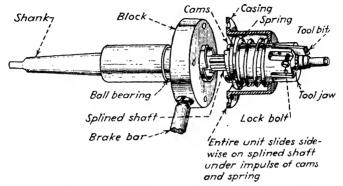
Tool and fixture for cutting clutch jaws in a lathe.
